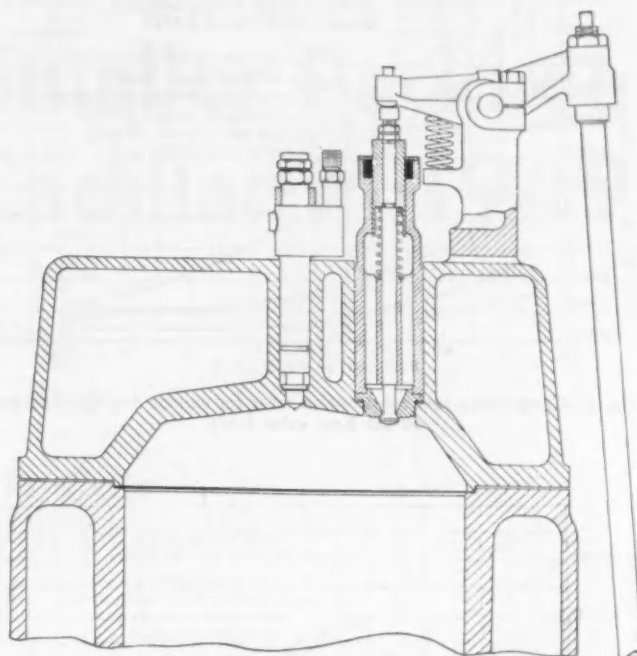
Low-pressure gas injection for 2-stroke gas diesel. Fuel oil injection is at center of head; gas injection at side
